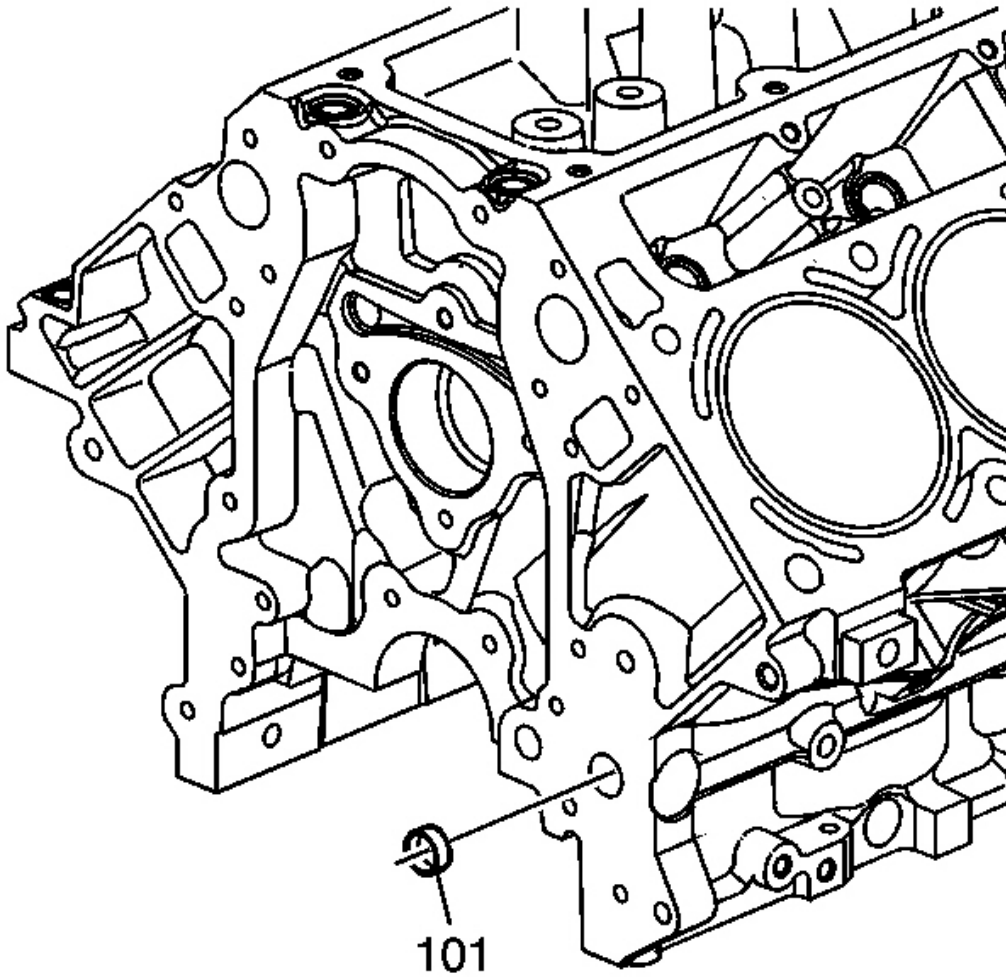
View Of Engine Block Front Oil Gallery Plug
